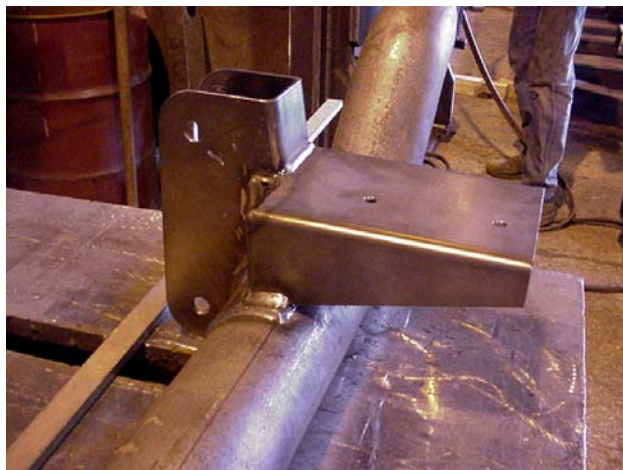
Steel interface-bracket assembly on subplate welded to tube.
